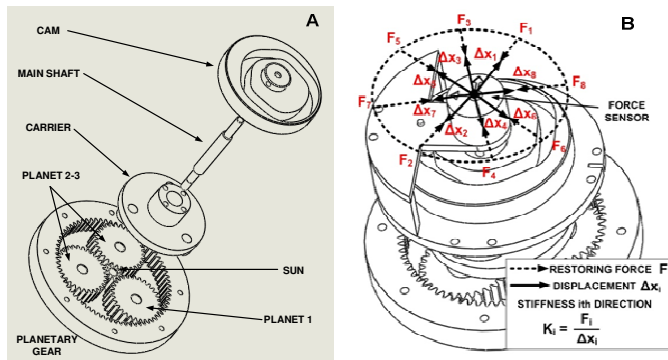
A: motion-generator is the assembly of a planetary gearhead and a cam mounted on the main shaft which delivers the motion. B: mechanical sketch of the assembly and radial perturbations: on the top the force sensor is rigidly connected to the end effector and superimposes different radial perturbation ΔX_i due to cam rotation over the course of planetary gear motion. Only 8 directions are depicted to simplify the sketch.
